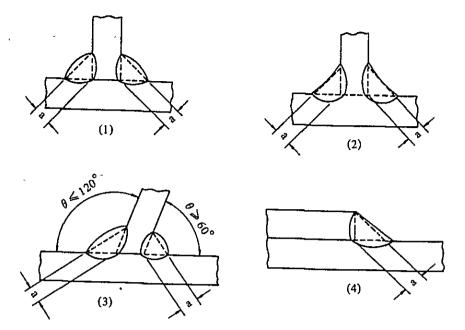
Throat Thickness of Fillet Weld
